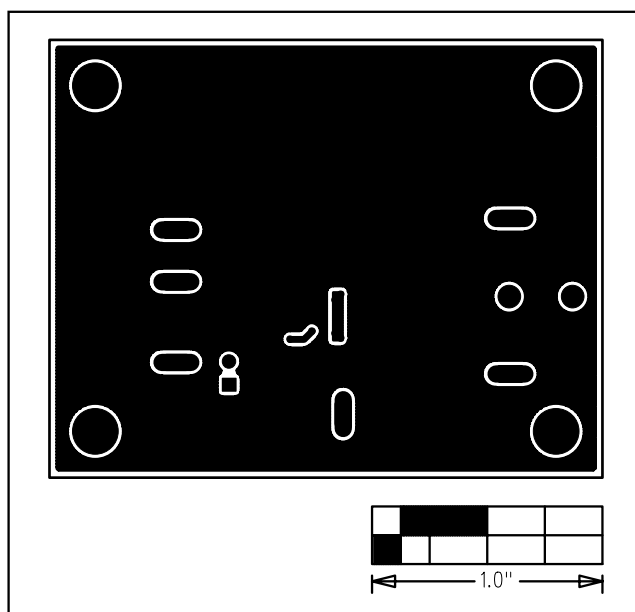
MAX9788 EV Kit PCB Layout—Solder Side
